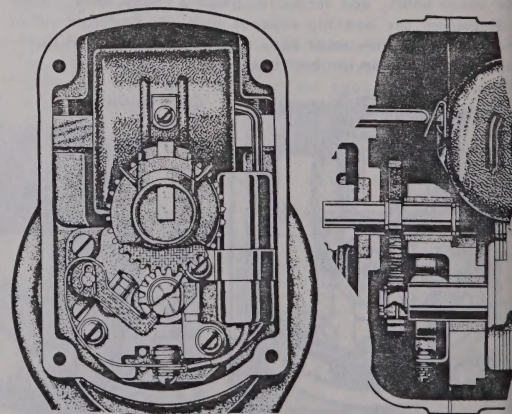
Bearing Support with Distributor Gear Assembly and Distributor Rotor
